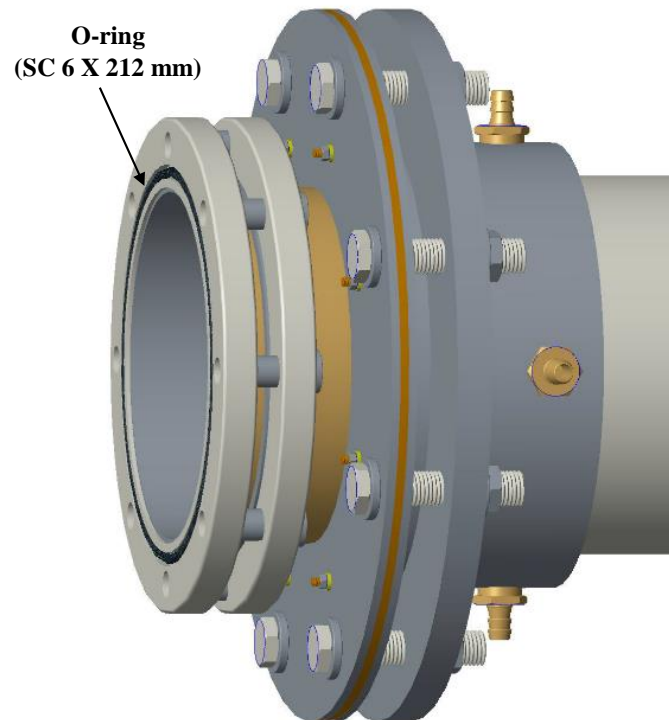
Condenser vacuum side showing the location of the O-ring and flange combination.
